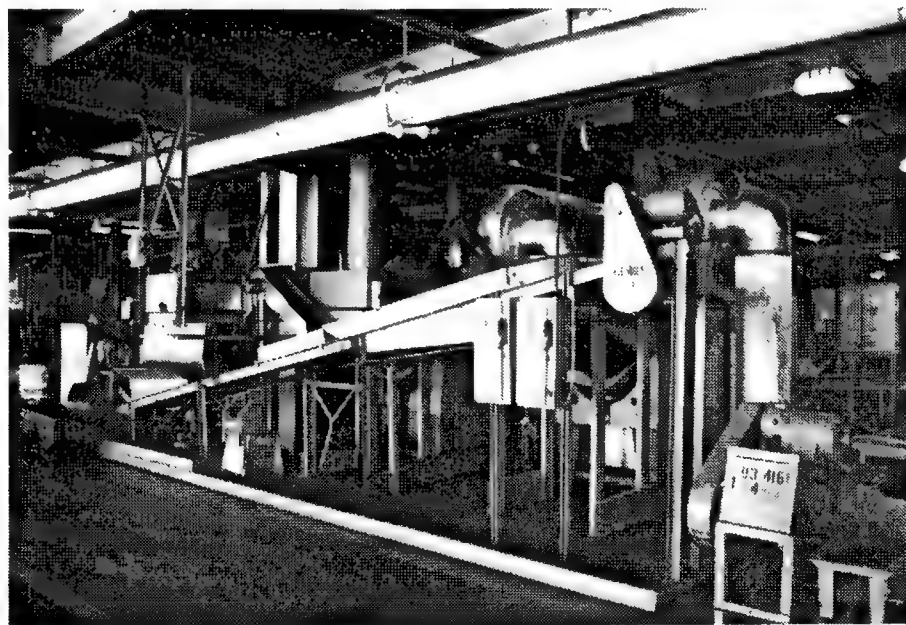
Building 3: Wash, Rinse, and Dry Machine manufactured by Colt's Manufacturing.
